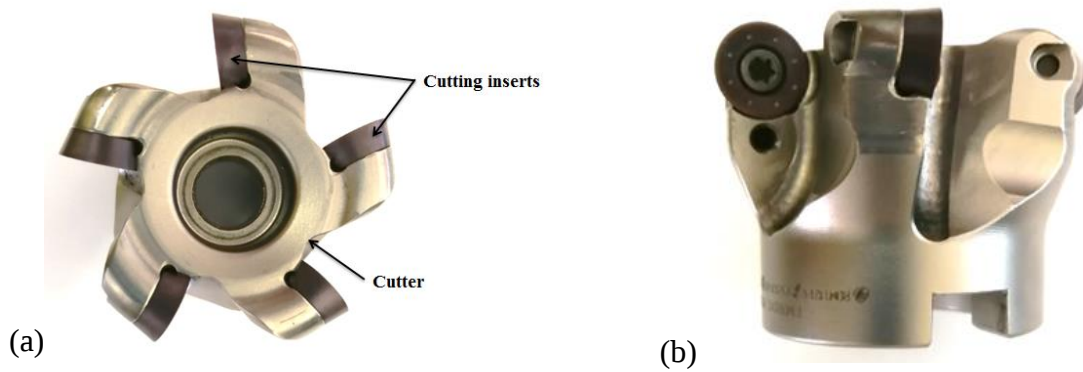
Fully loaded cutter (a) top view and (b) side view.
